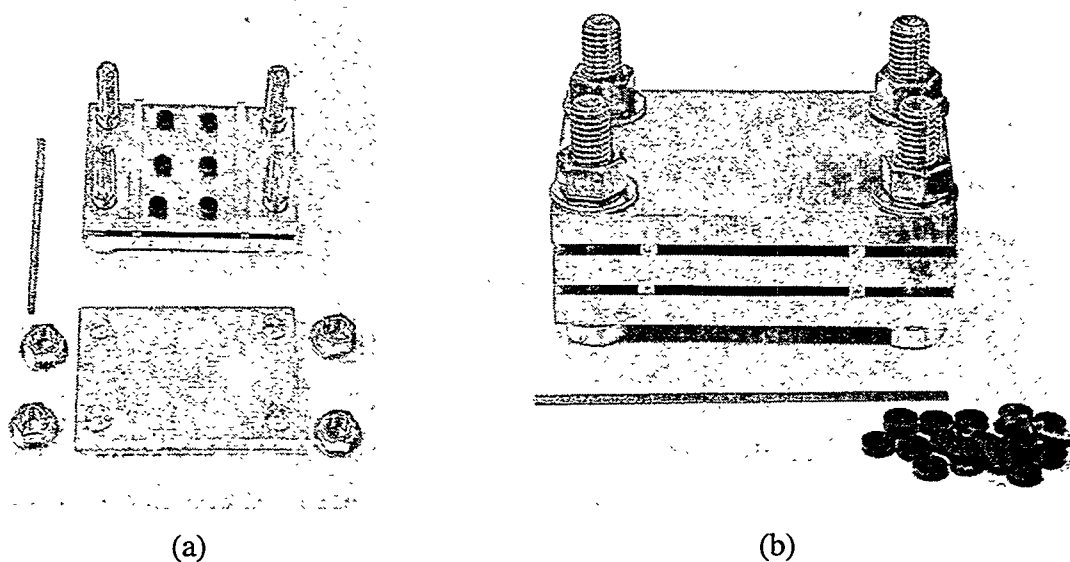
Compression set fixture: (a) a partly assembled fixture with the 4.5-mm spacer bars and rubber samples and (b) an assembled fixture with rubber samples.
